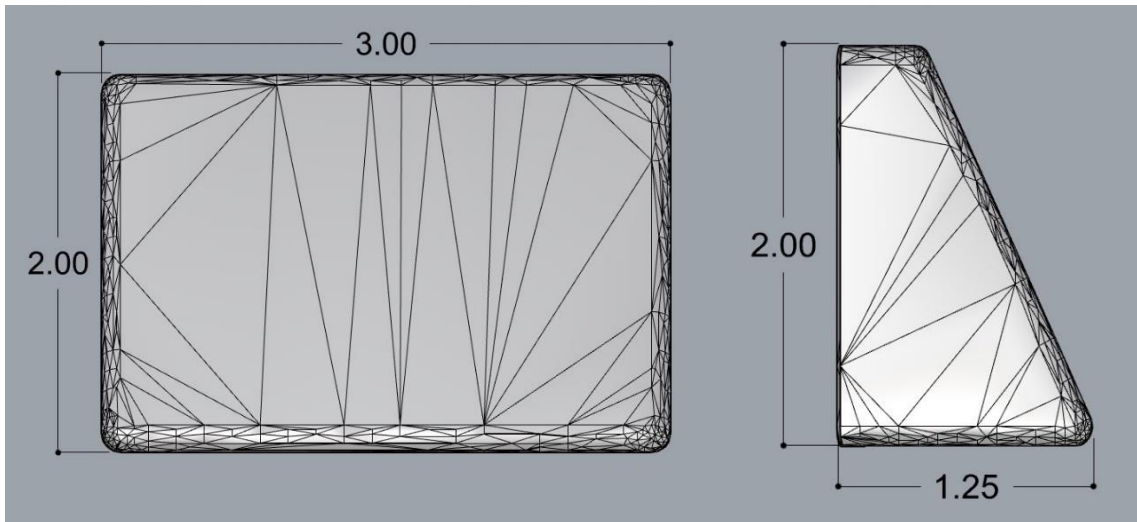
D. Dimensions of Beveled Horizontal Rectangular Attachment.
